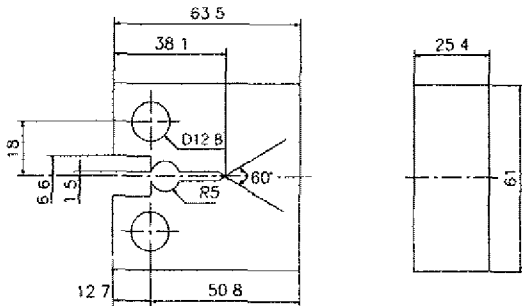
Dimensions of the specimen for fracture toughness test (unit: mm)
